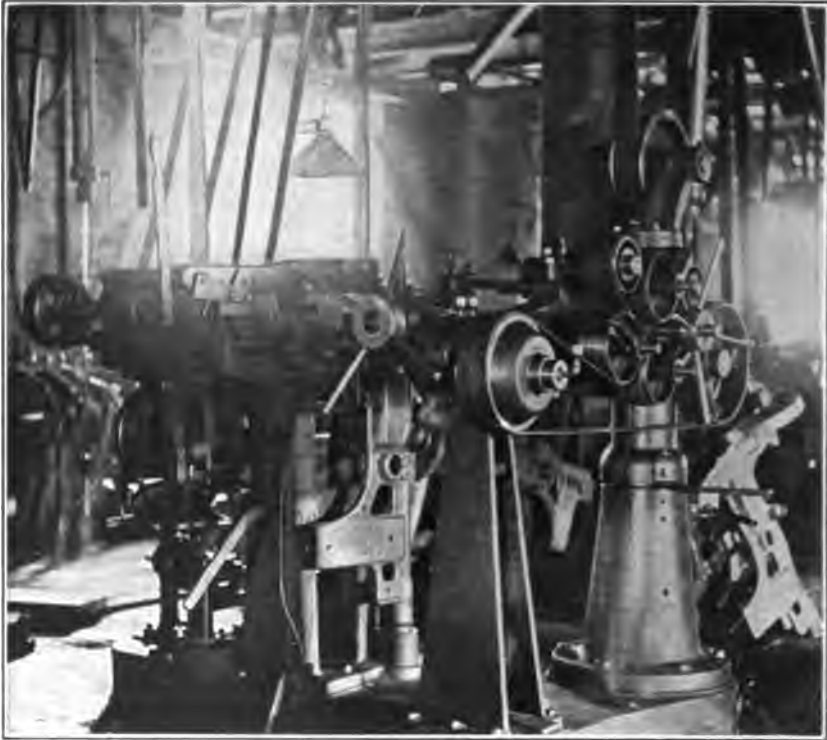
An unusual special machine for drilling a large number of holes simultaneously in pieces of a single kind. Machines of such highly specialized type are peculiarly adapted to high-speed tools.
